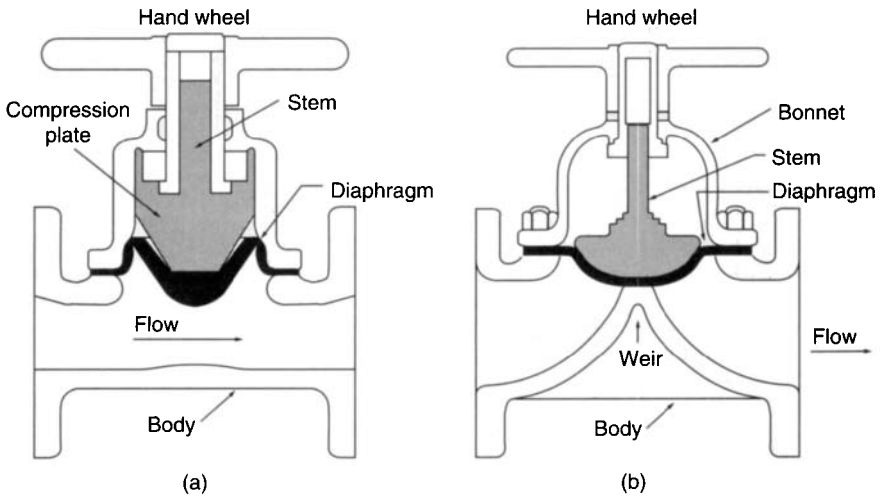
Diaphragm valves. (a) Straight-through valve in open position; (b) weir-type valve in closed position.
